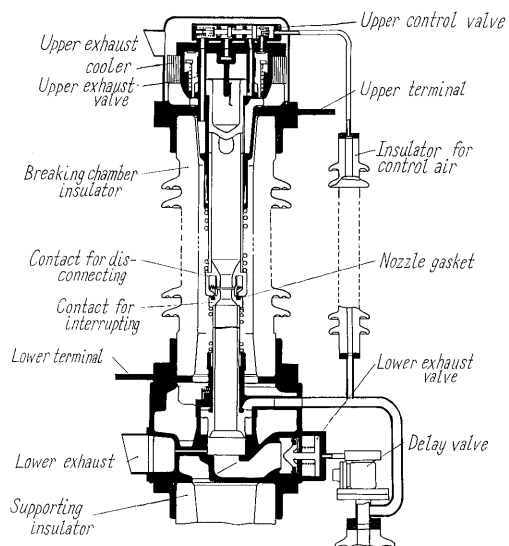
Cross-sectional view of breaking chamber (84 kv unit)
